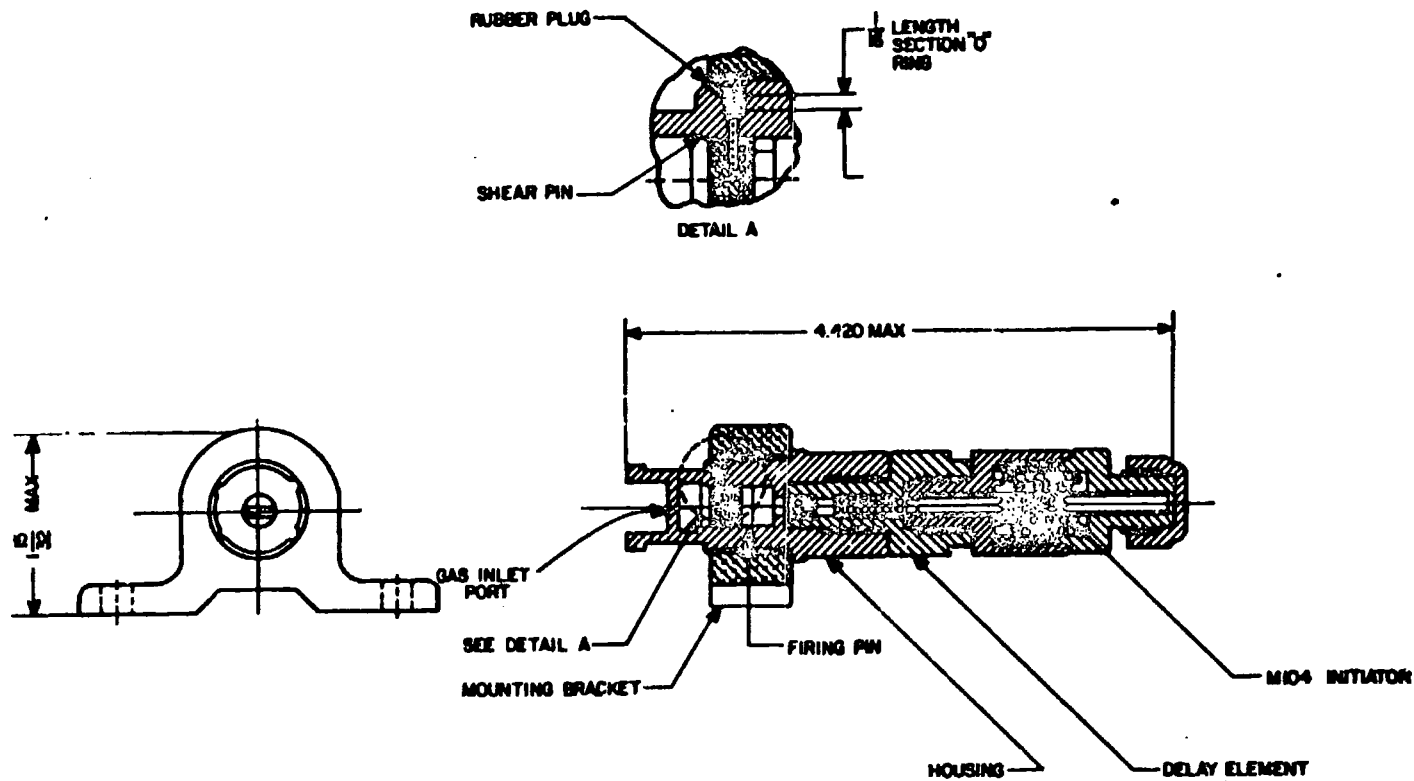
Initiator, Propellant Actuated, Delay, M113 Assembly
